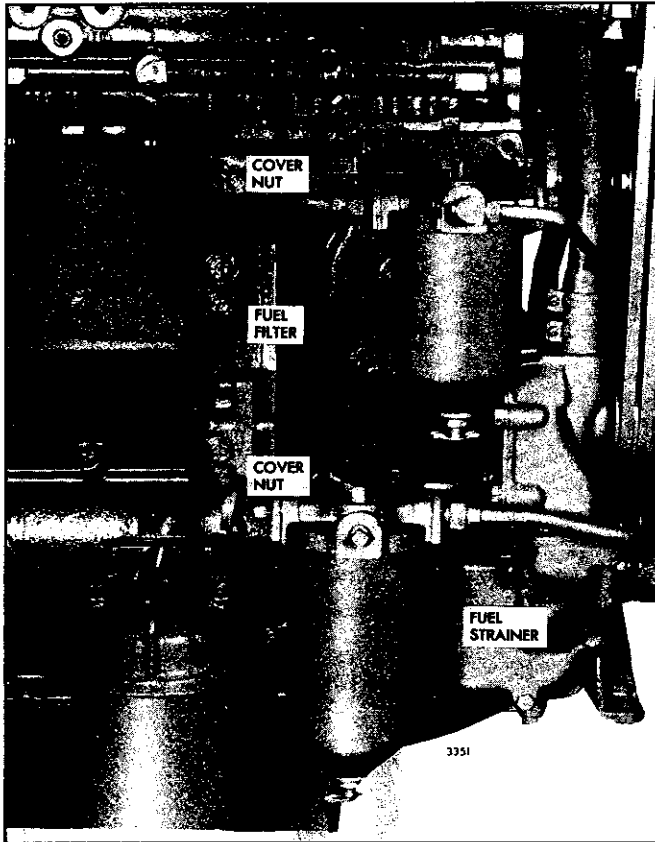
Typical Fuel Strainer and Fuel Filter Mounting
